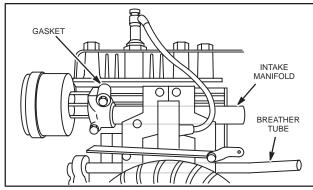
BREATHER AND INTAKE MANIFOLD
